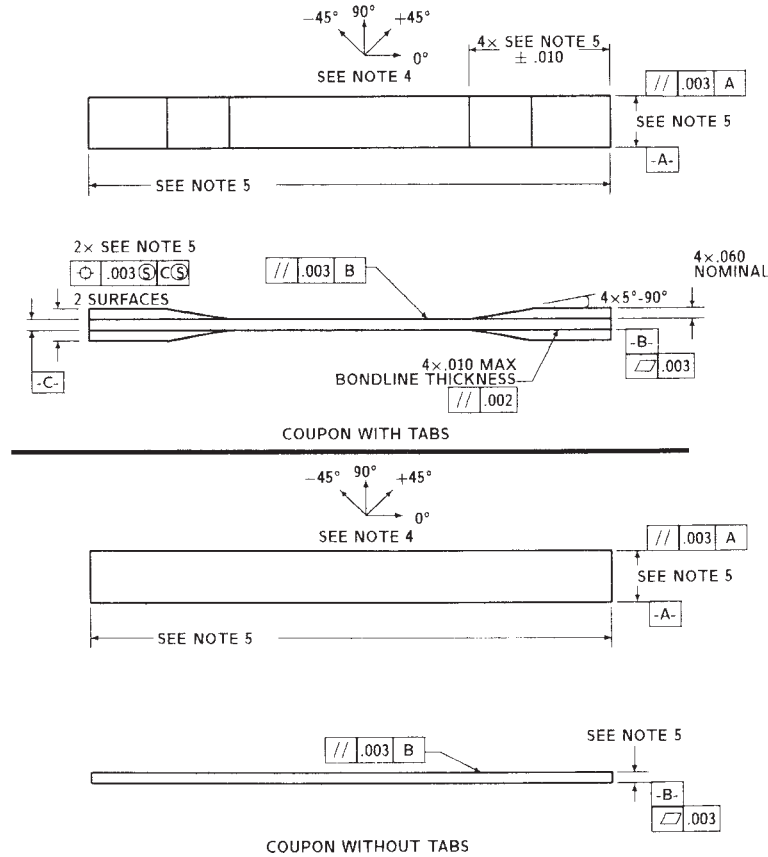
Tension Test Specimen Drawing (inch-pound)
